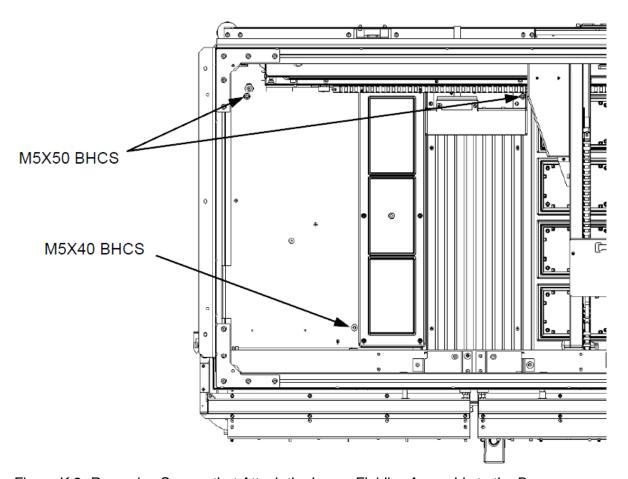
Removing Screws that Attach the Lower Fluidics Assembly to the Base
